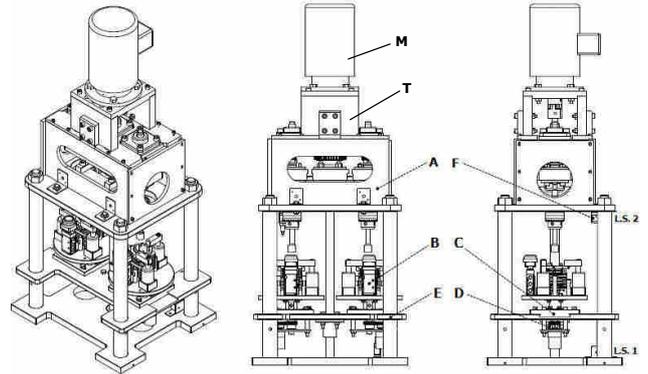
The complete design idea of the whole prototype machine in its isometric and two side views.
